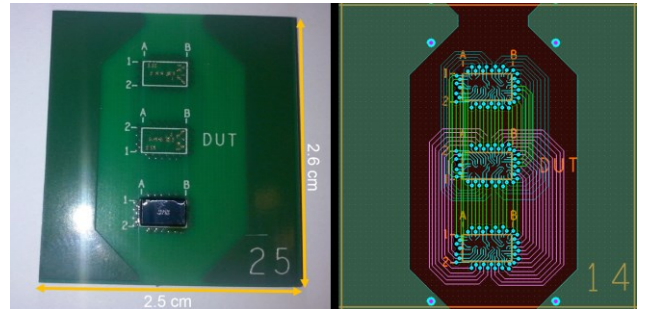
ESD testchip module mounted on an RF board (photography and layout view).
